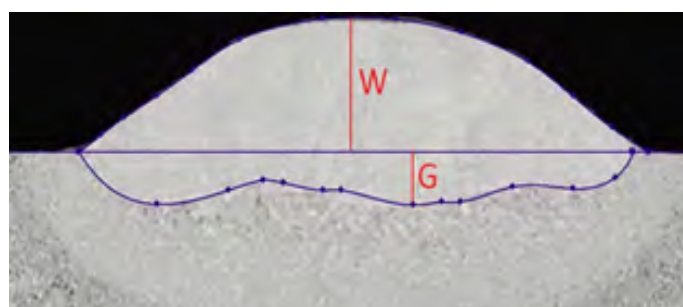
Identification cross-sectional areas, height (H) and penetration depth (D) in the overlay welds
